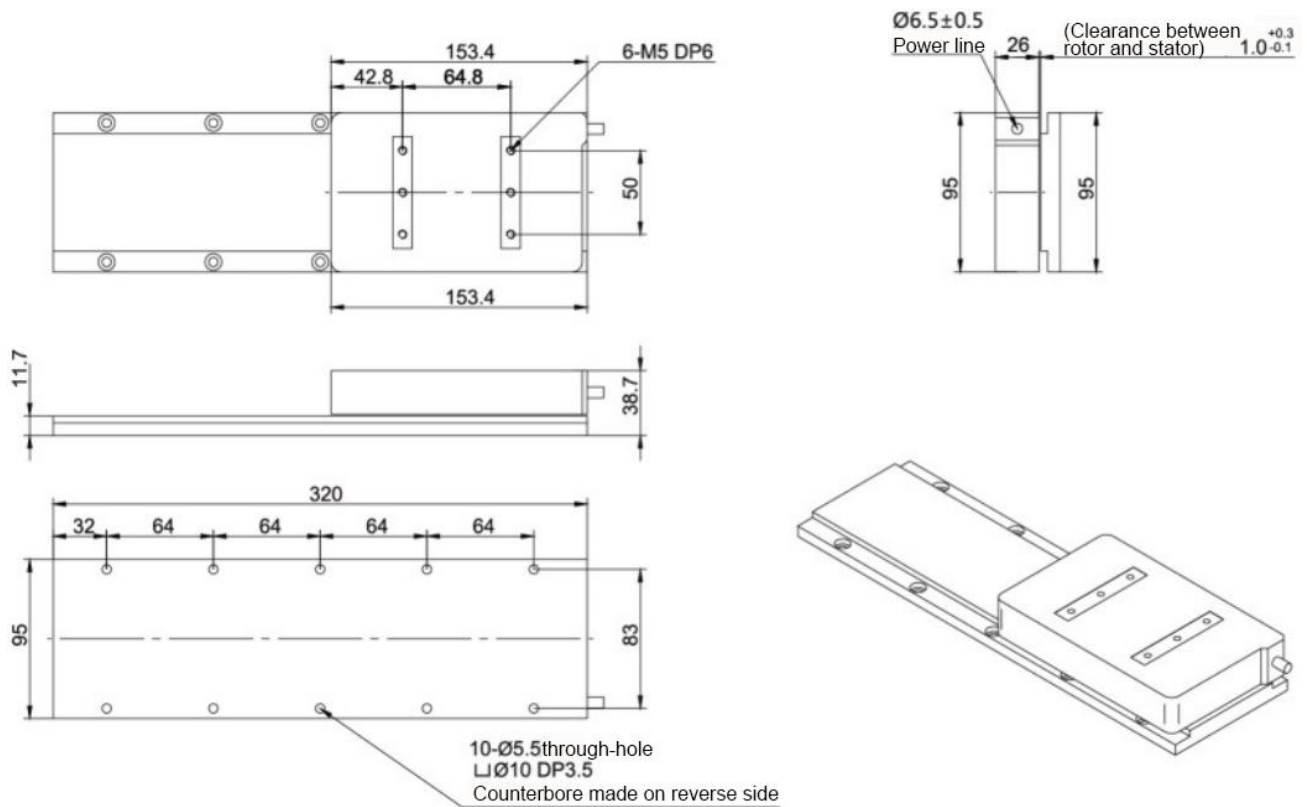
Dimensional drawing of WZCR-AZ95C2-□ motor
